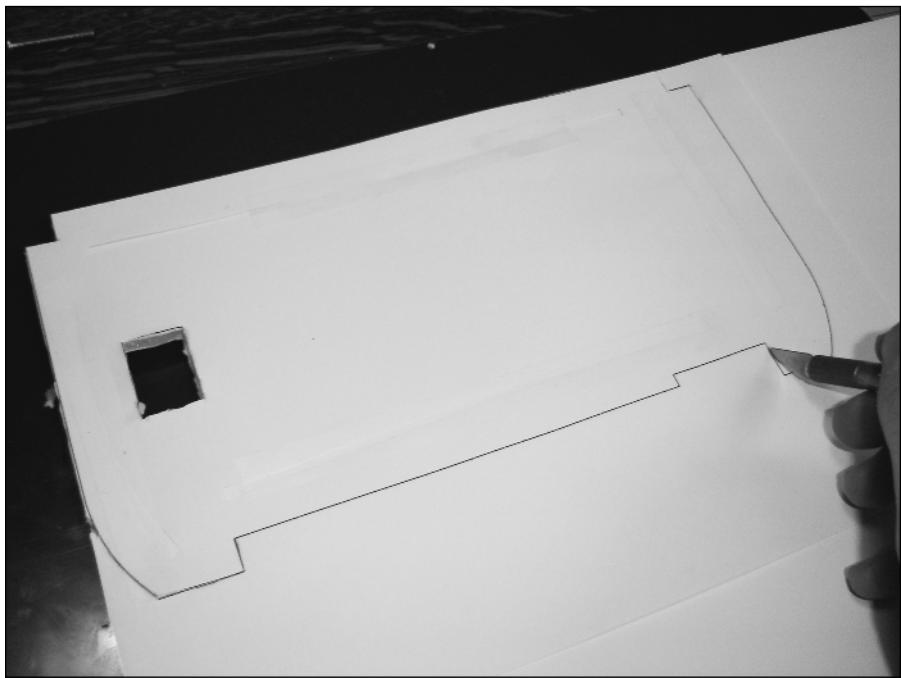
Cutting the 1/4" spacer. An X-Acto foam board is shown here.
